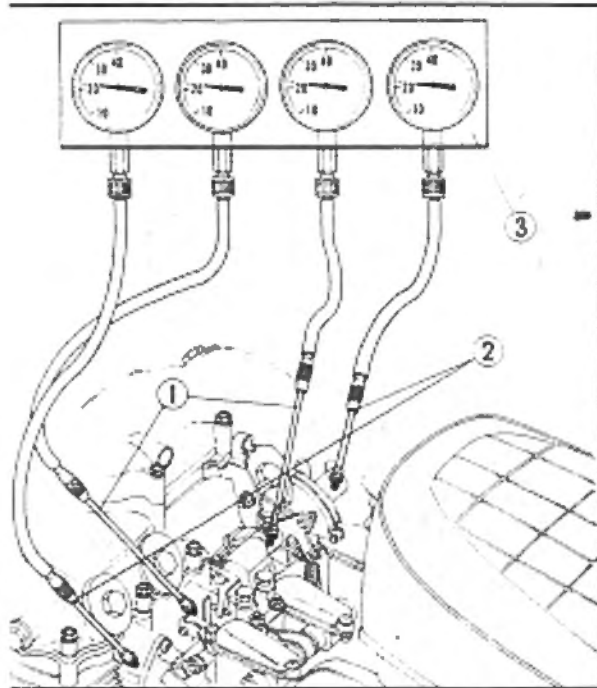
① Adaptor A ② Adaptor B ③ Vacuum gauge
